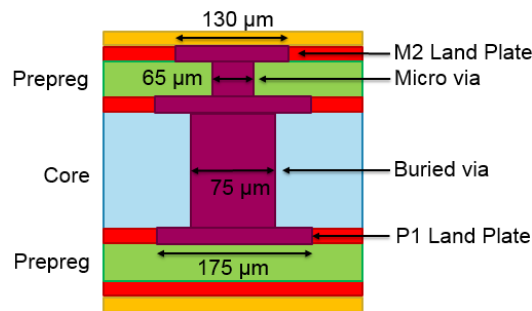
Cross sectional view of the core and the build-up with vias and land-plates dimensions.
